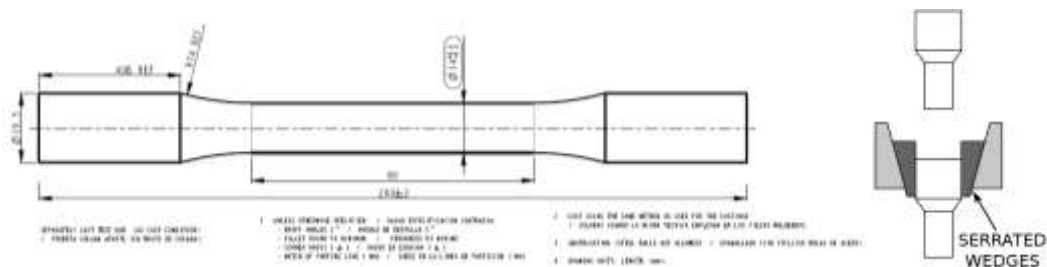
a) Drawing and dimensions of the test specimen used in the mechanical tensile tests. b) Specimen gripping system employed for the experimental test.
